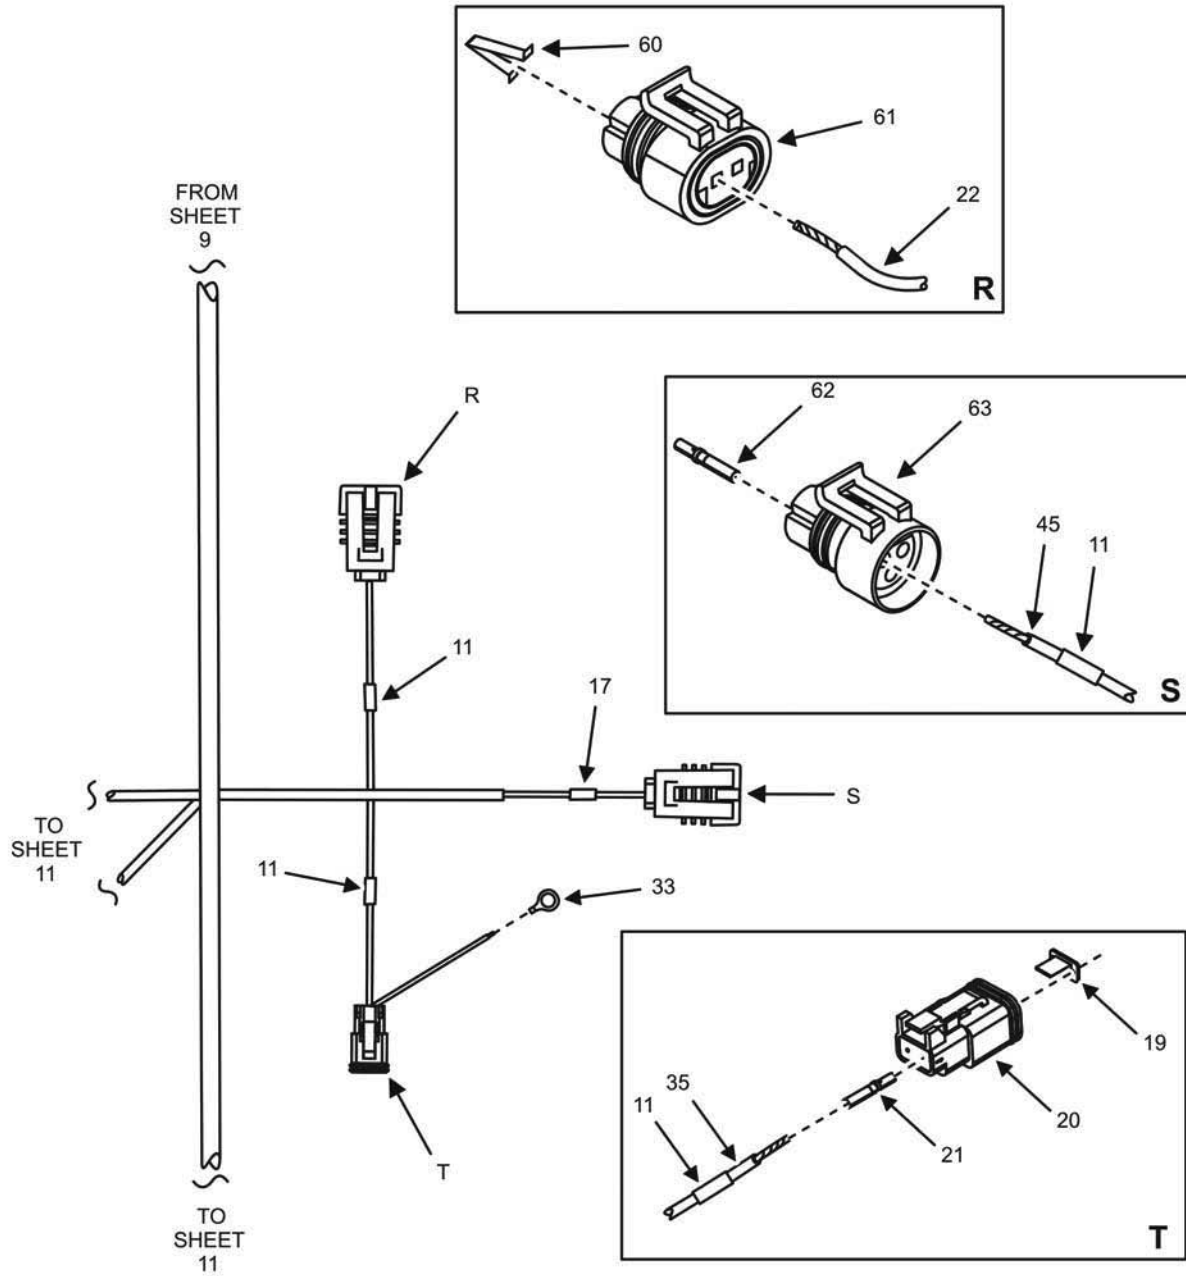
Engine Wiring Harness (Sheet 10 of 14).
